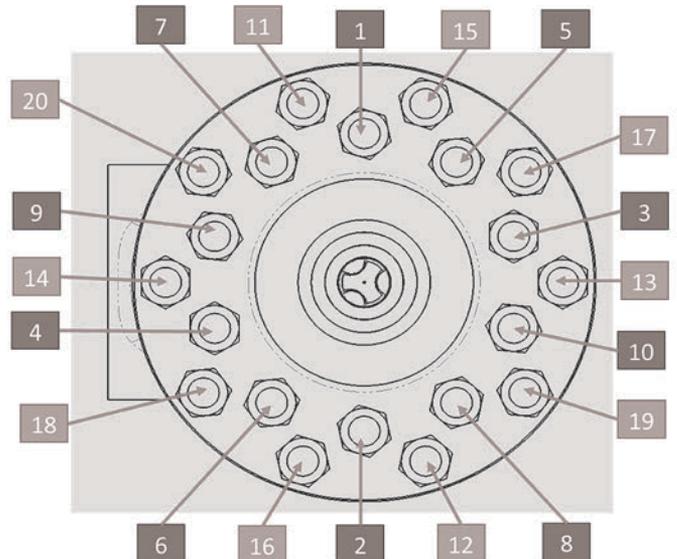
Torque Sequence Single Bolting Circle 20 Bolts
